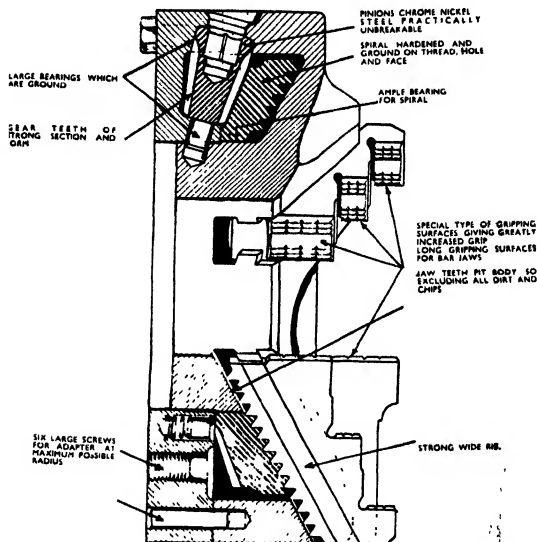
Cross-Section through Taylor's Self-Centring Chuck.
